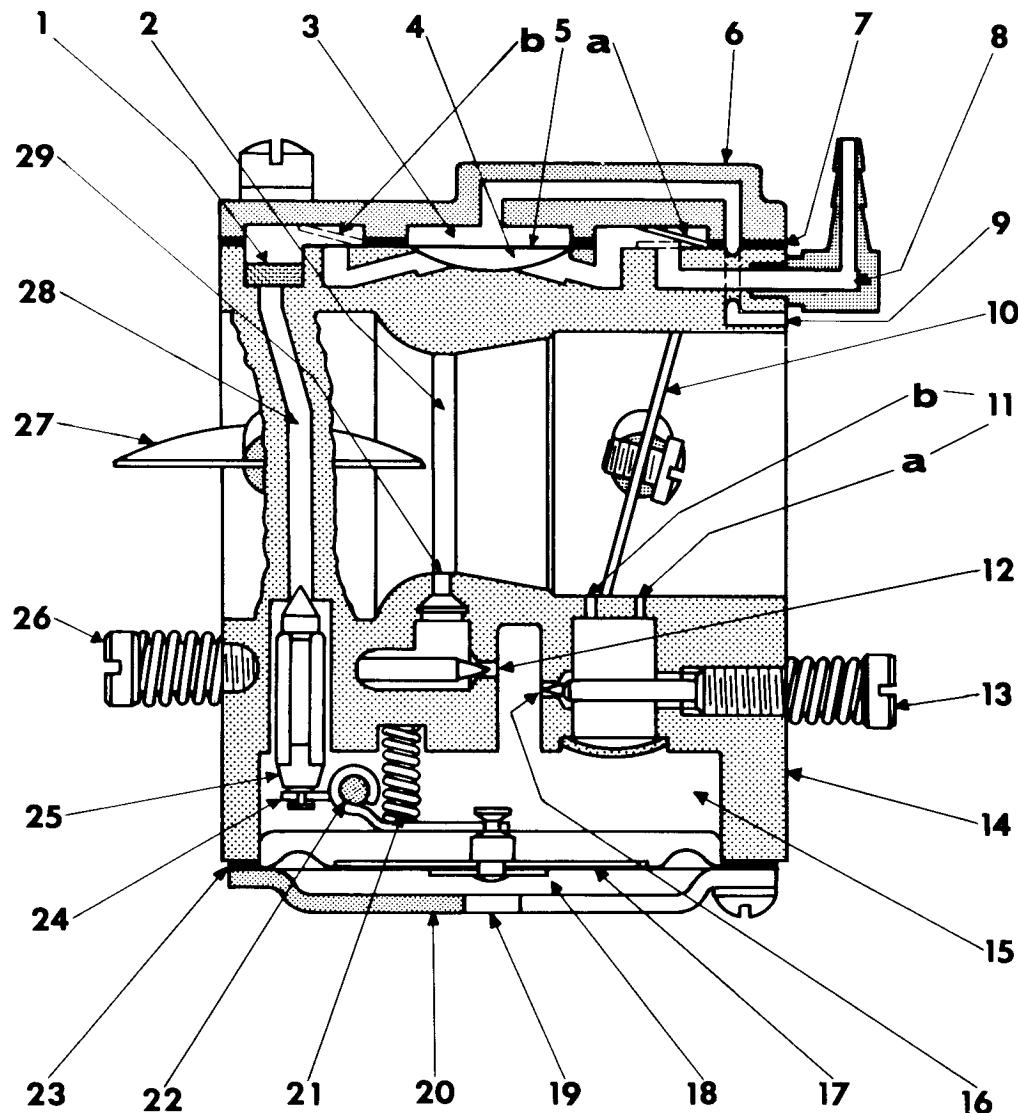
This cross-section is a schematic diagram showing how the carburetor works.
